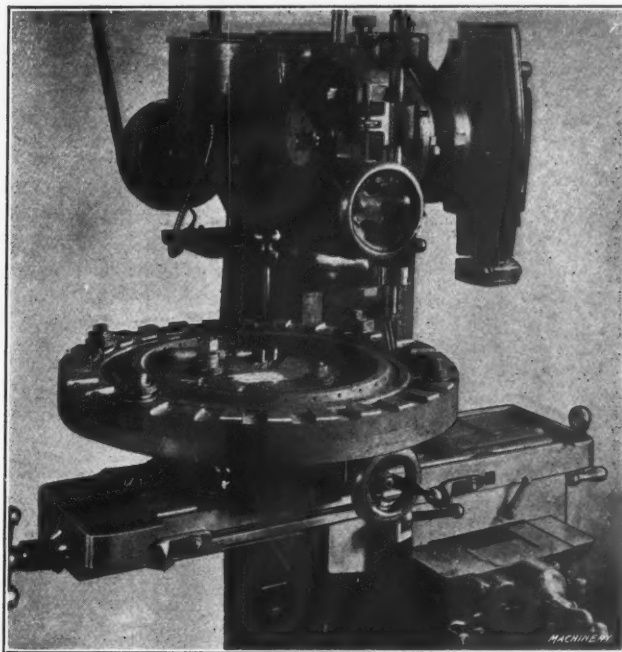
Milling Faces of Pads Straight. Alternate Pads are 0.030 inch longer than Adjacent Pads
